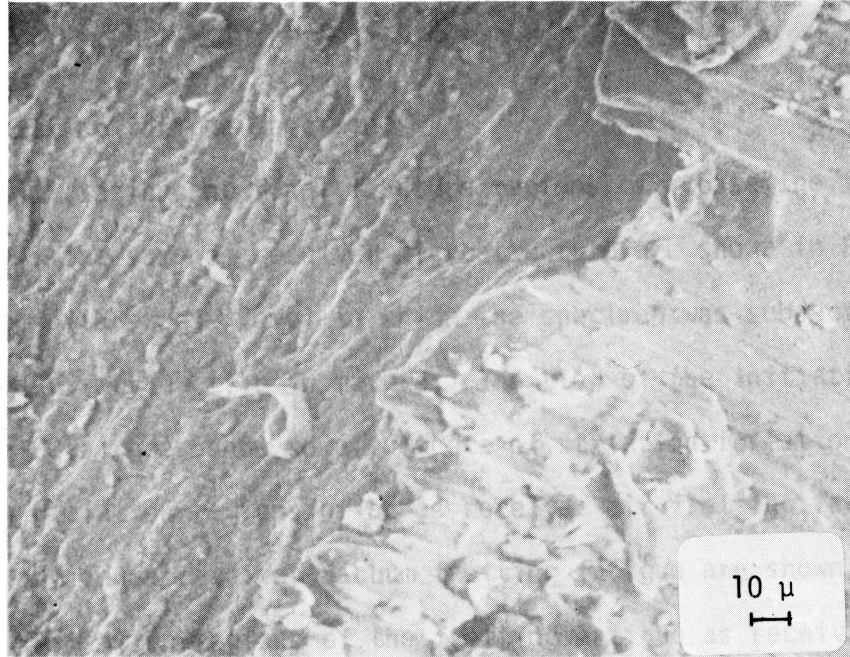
Intersection of wear and fracture surfaces of a martensite specimen (8-65; 2,128,300 cycles) - fretting fatigue in vacuum.
